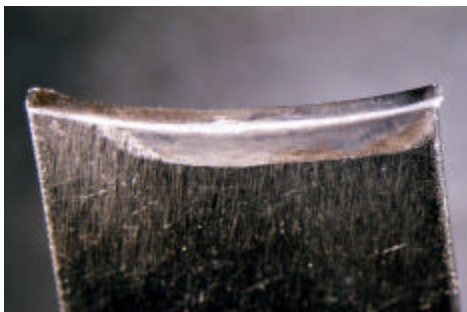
Arm section fracture surface showing degree of wear and loss of detail.
